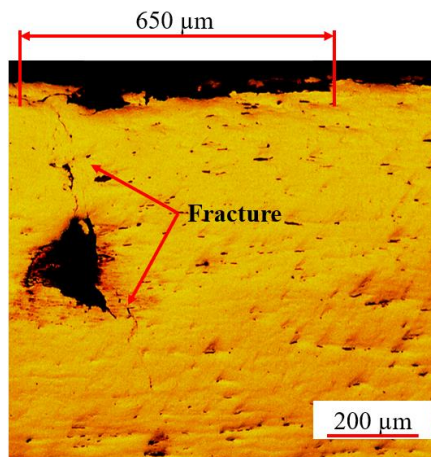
Fretting fatigue crack and extension of eroded surface on a steel shaft
